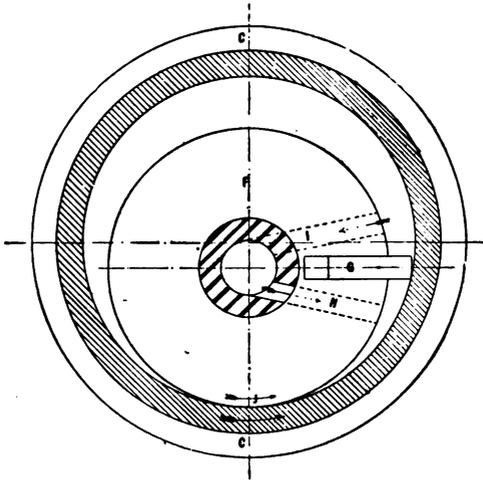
END SECTIONAL VIEW, “HULT” ROTARY ENGINE.
